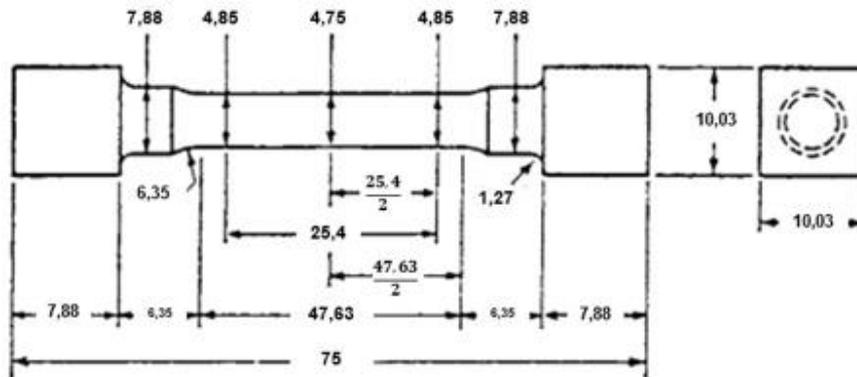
Specimen dimensions adapted from the ASTM E8M standard for tensile testing.
